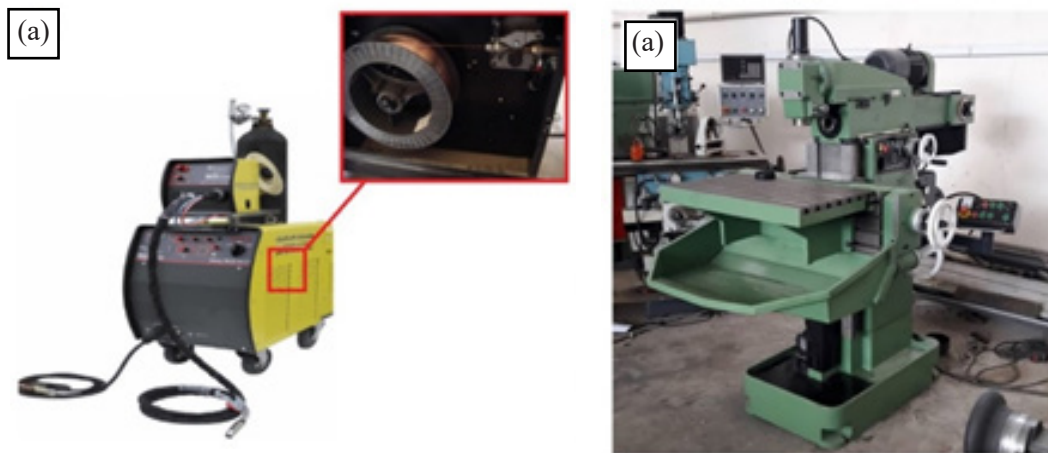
GMAW devices; a) Carry MIG 501, b) FP4M machine.
